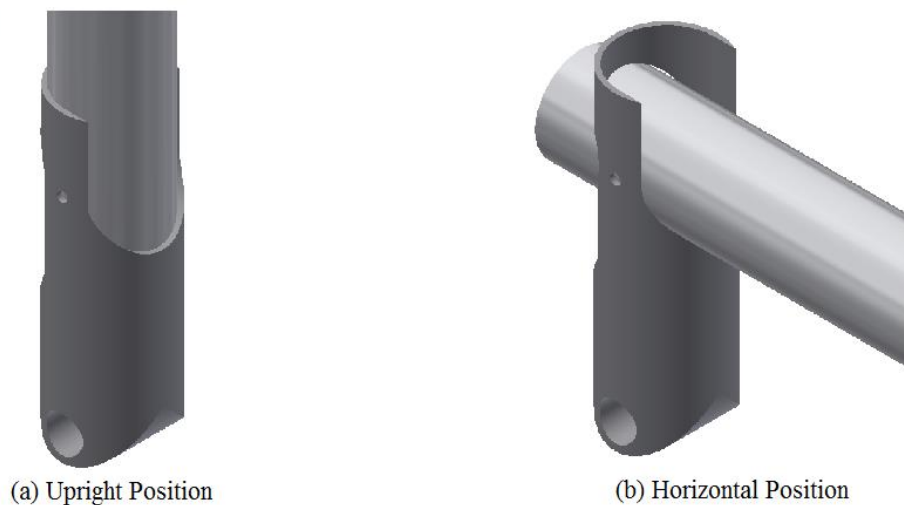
CAD model of upright camera pole mounting alternatives: displaying both (a) Upright Position and (b) Horizontal Position.
